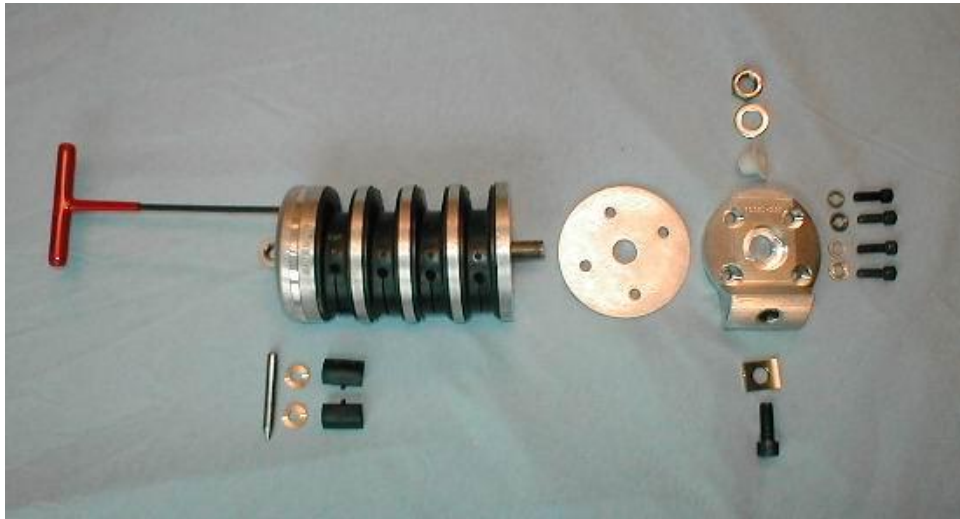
NODDING JOINT BRACKET REMOVAL
